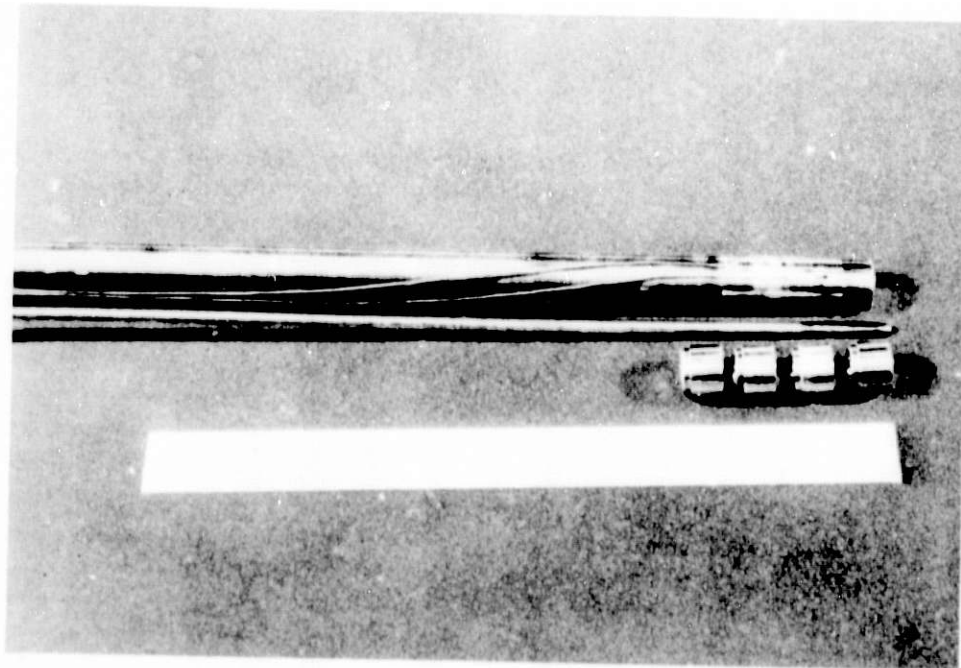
Details of Tube Specimens in the Unassembled and Assembled Configurations with Thermocouples in the Attached Position.
